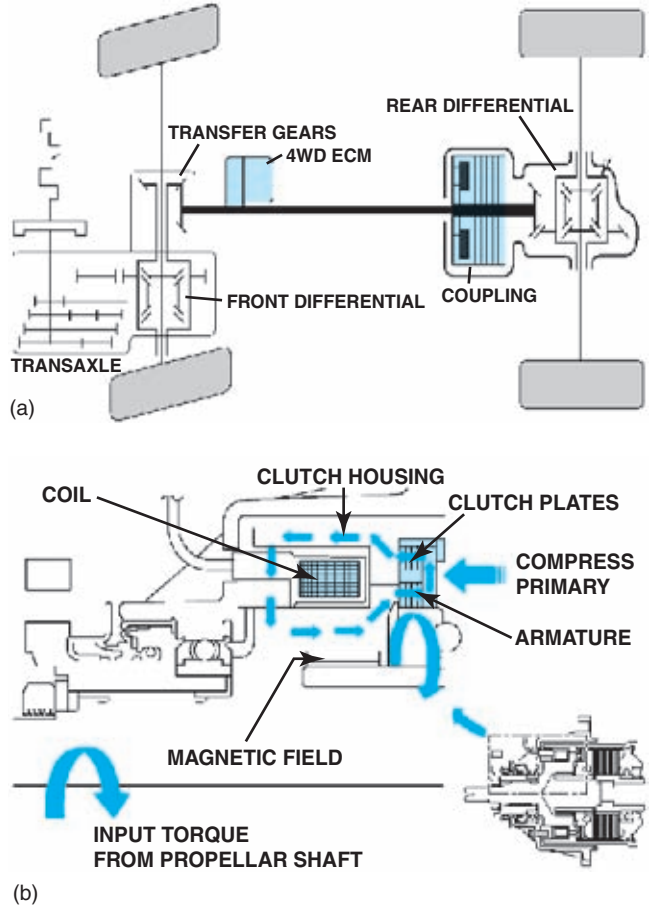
This AWD vehicle uses an electromagnetic coupler at the rear drive axle (a). The exploded view of the coupler shows the magnetic force applying the pilot clutch (b). (Courtesy of Hyundai Motor America)
